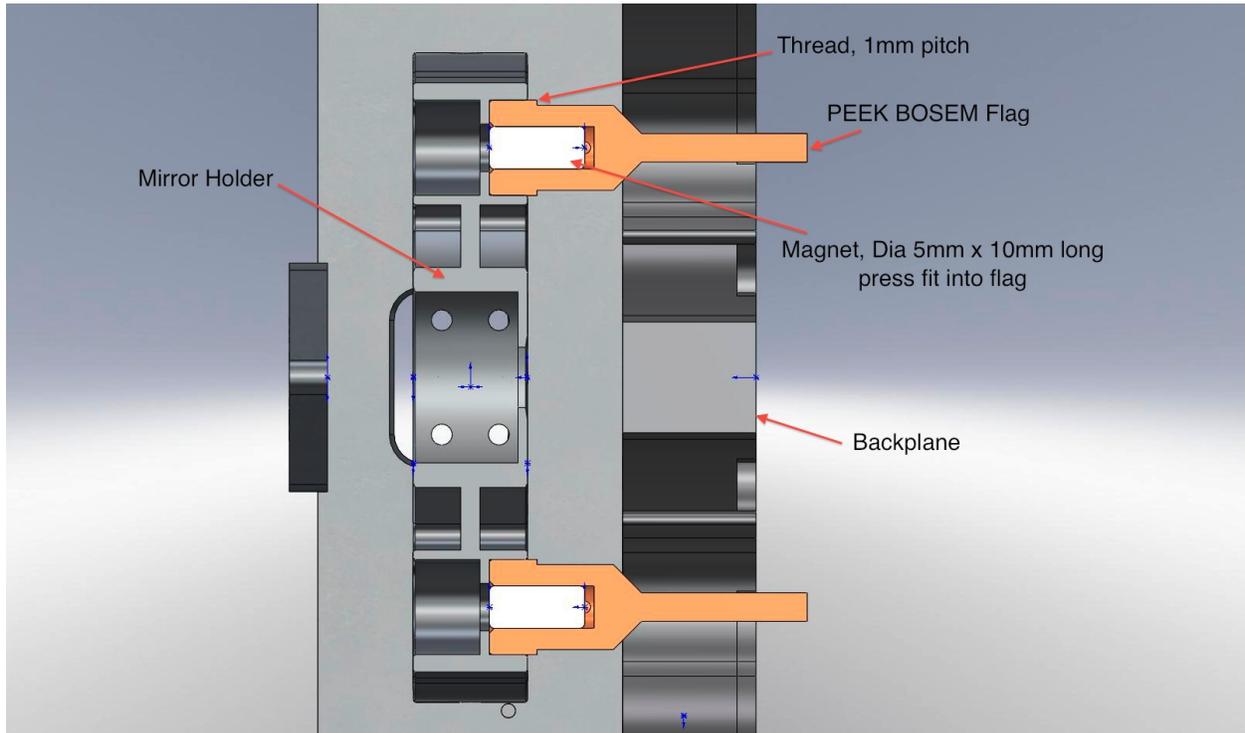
Flag assembly with magnets press fitted into PEEK flags.
